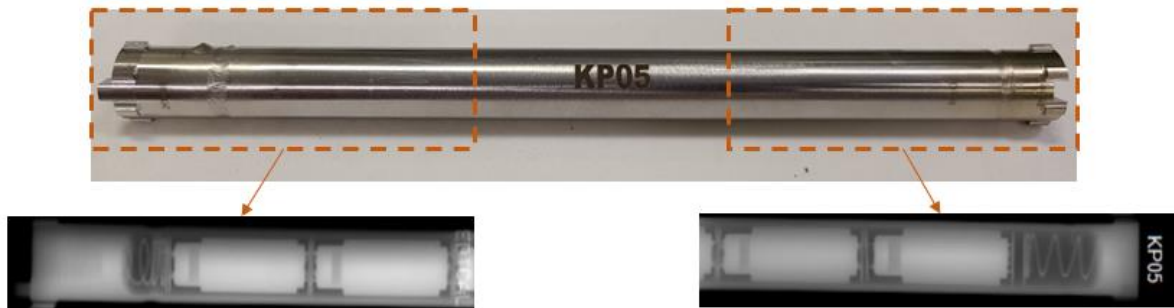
Final target fully welded (top), and radiography of the welds (bottom left and right)
